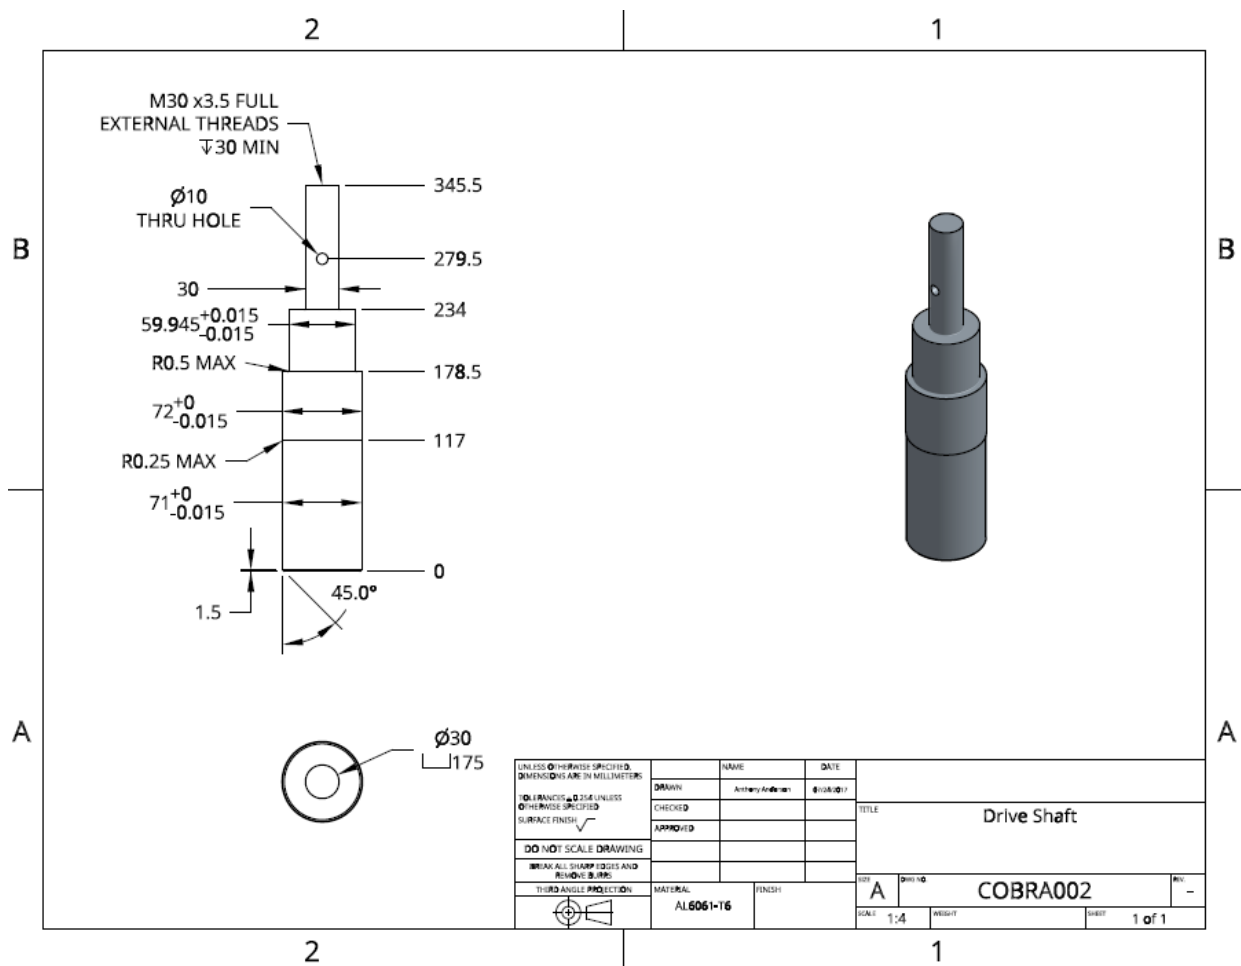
Manufacturing drawing of drive shaft. See Appendix B for all part drawings.
